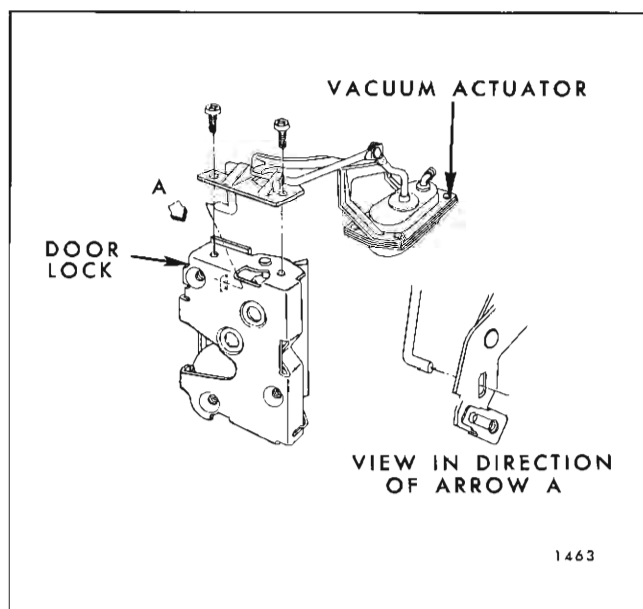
D80—Rear Door Vacuum Lock Actuator Attachment
